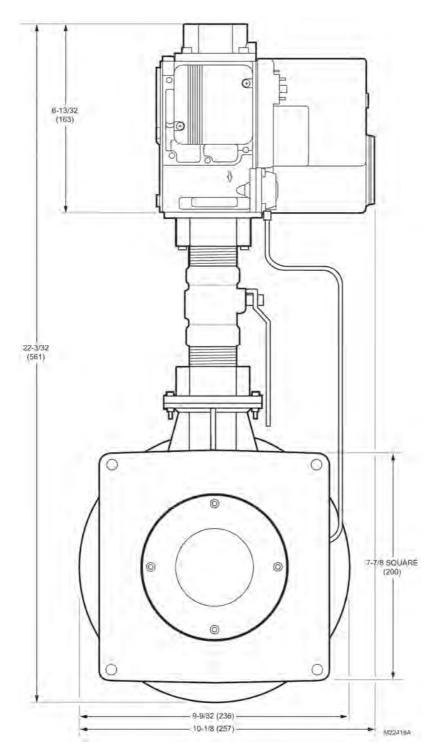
Venturi, 500 kW, with V4730 gas valve and valve shutoff kit installed, dimensions in in. (mm), part 2
